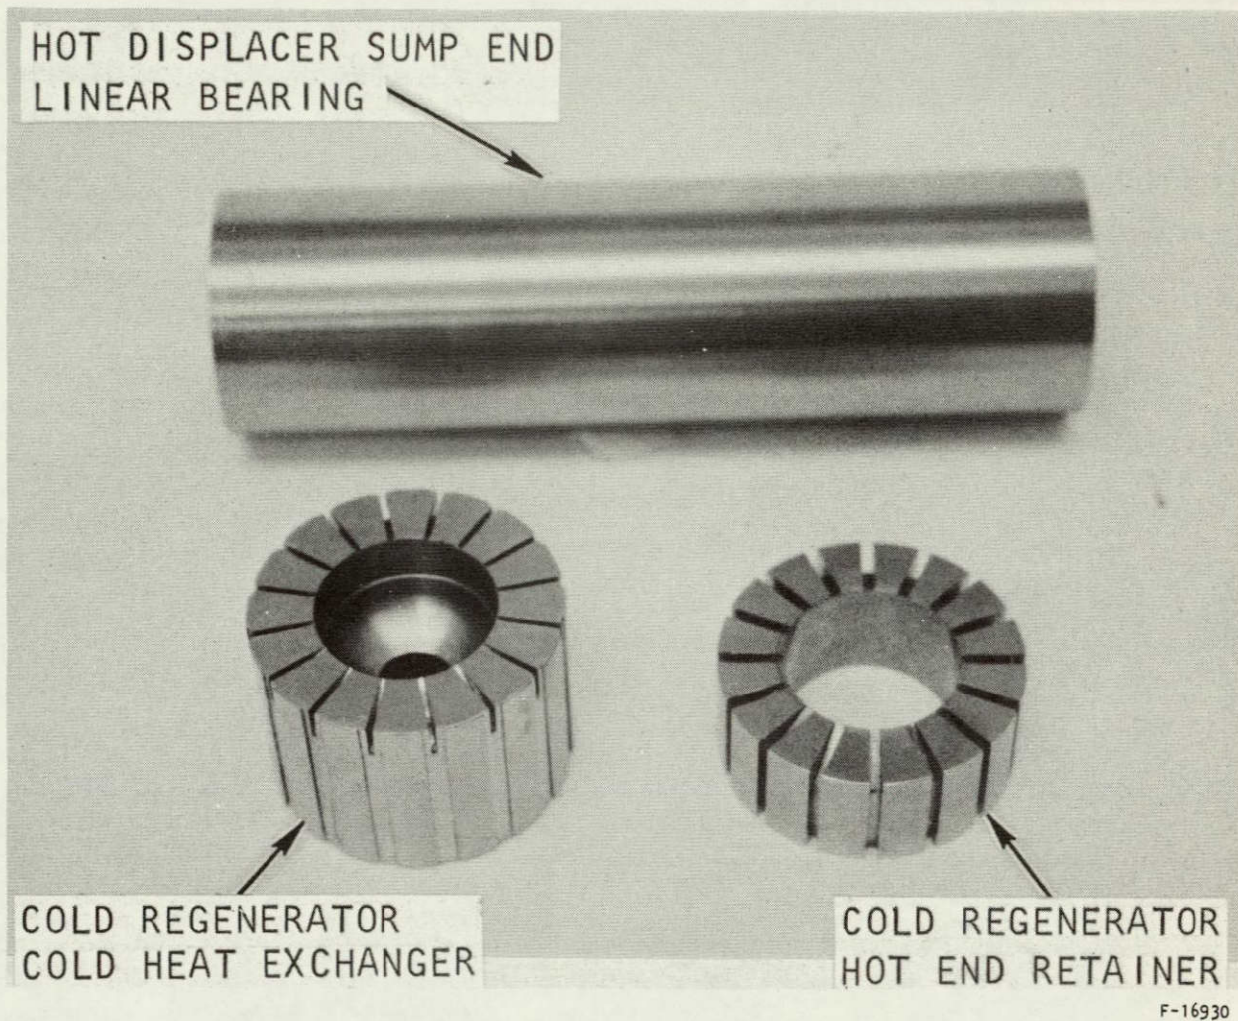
Hot Displacer Bearing, Cold-End Heat Exchanger, and Cold Regnerator Retainer
